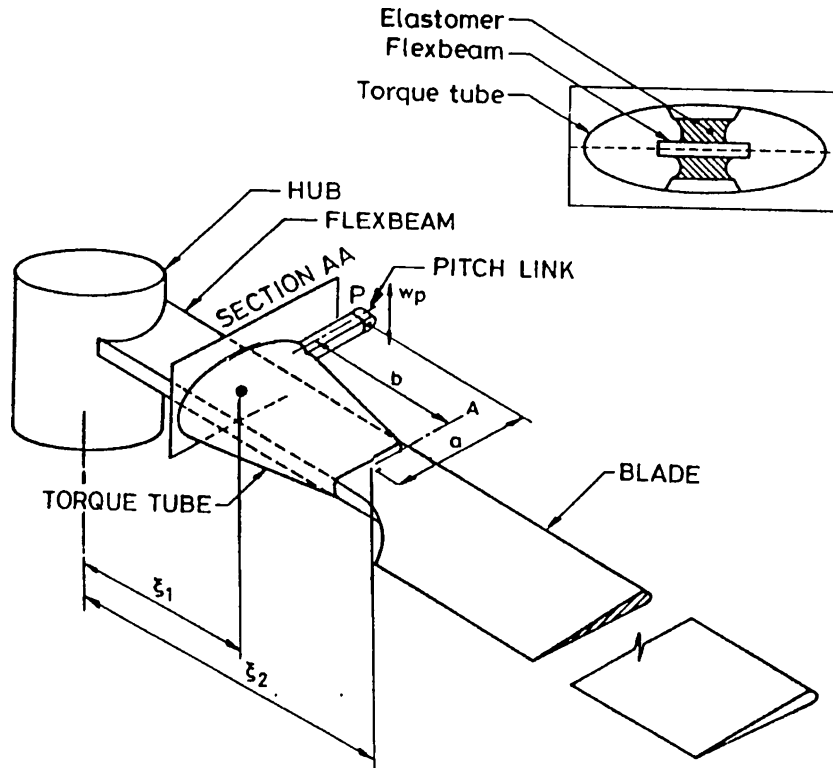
Bearingless rotor blade with pitch link at the leading edge.
